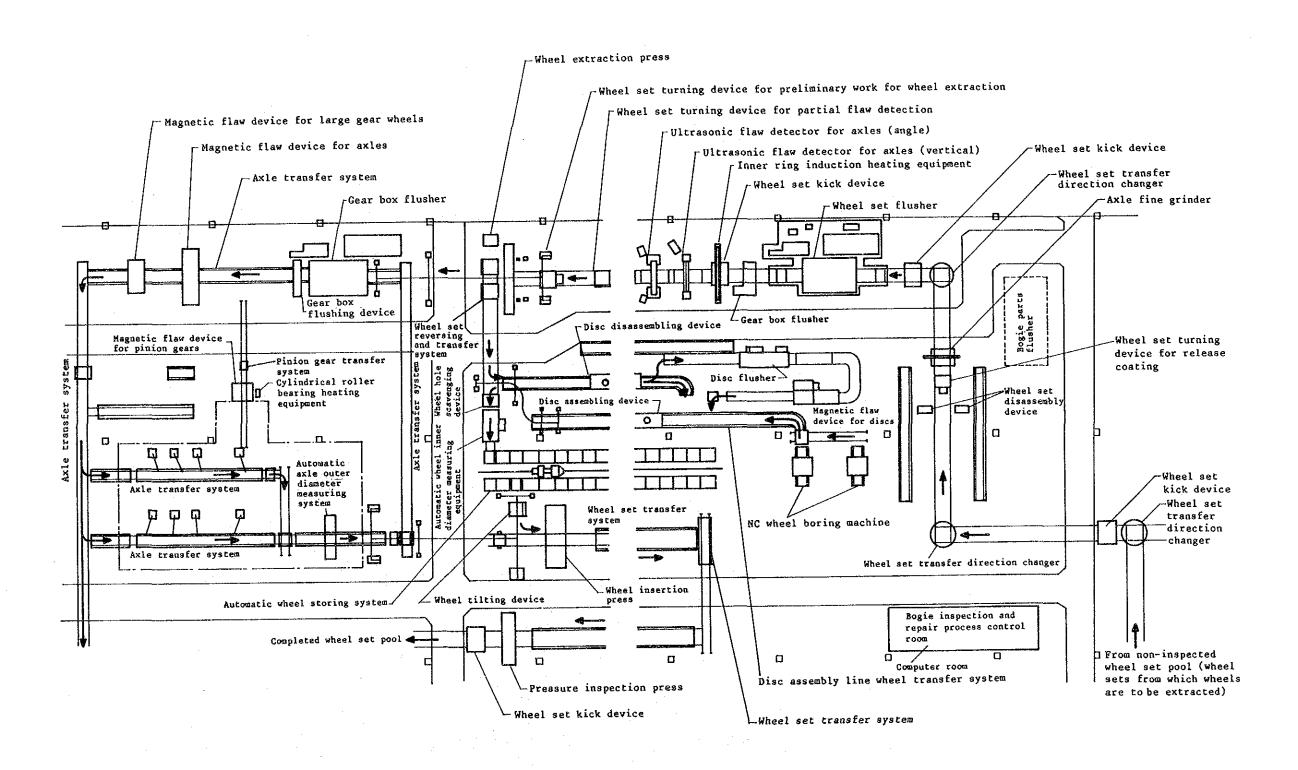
Layout 1 for Wheel Set Inspection and Repair Facilities
